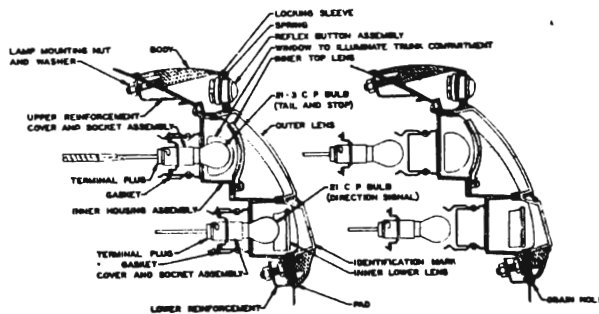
Tail and Stop Light, Disassembled—Series 40-60-90
